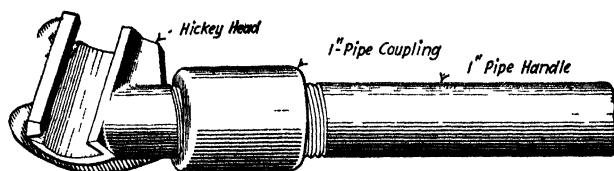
Assembled hickey. Hickey head in 1-in. pipe handle. See Fig. 181 for a hickey head. (M. B. Austin Co., Chicago, Ill.)
